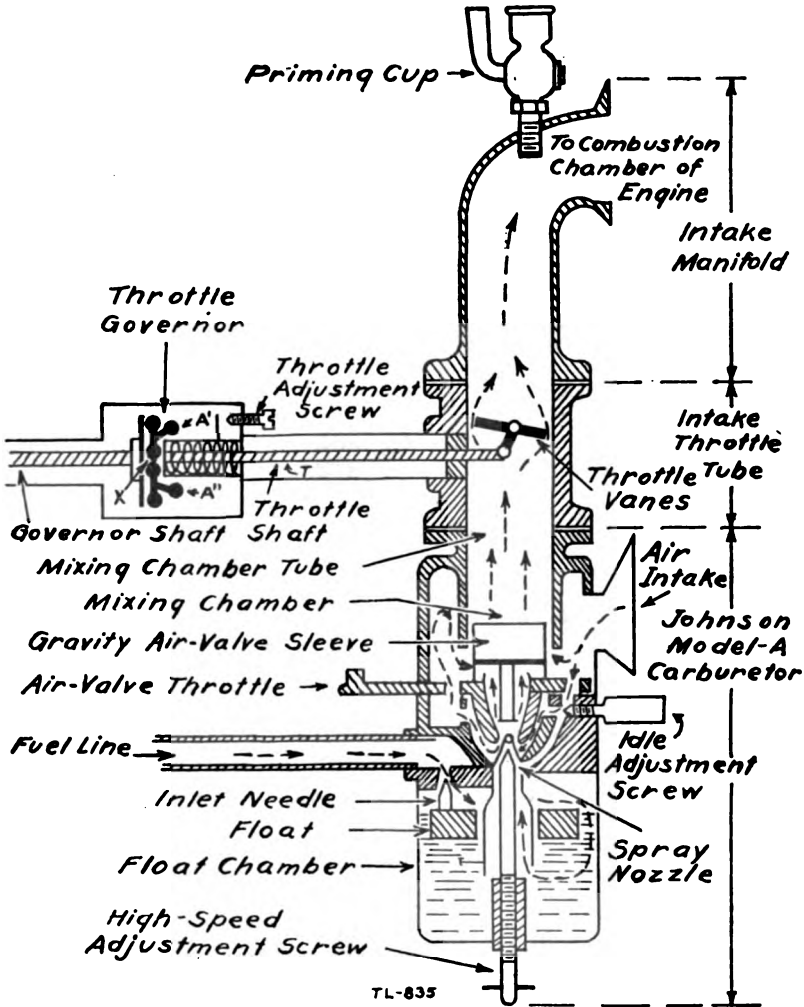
Assembly of the gasoline-engine carburetion system
